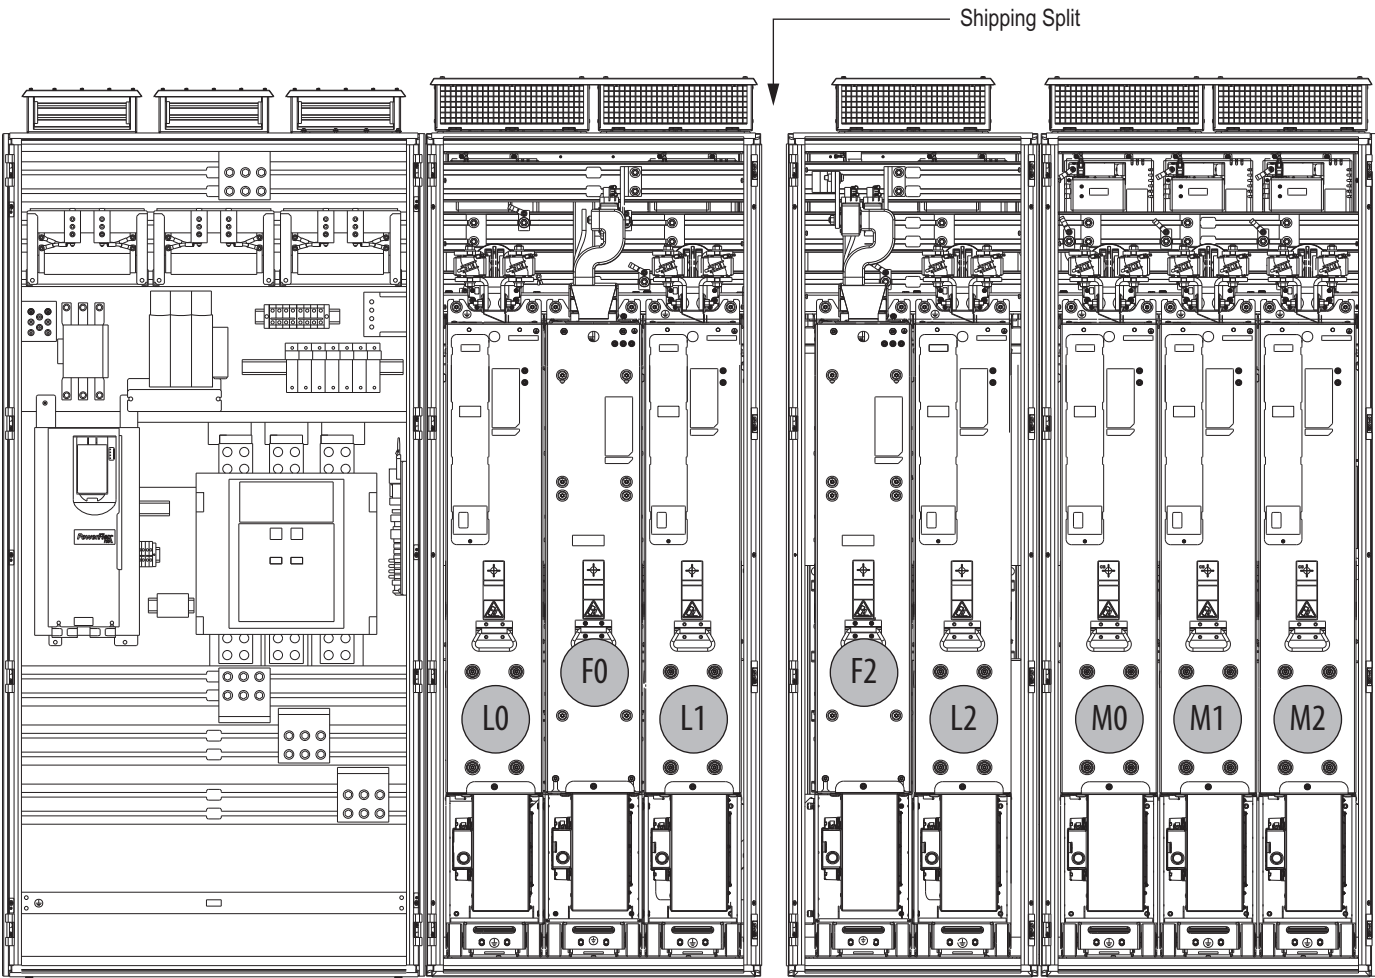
19XR Frame 9 PF755TL Drive Components
